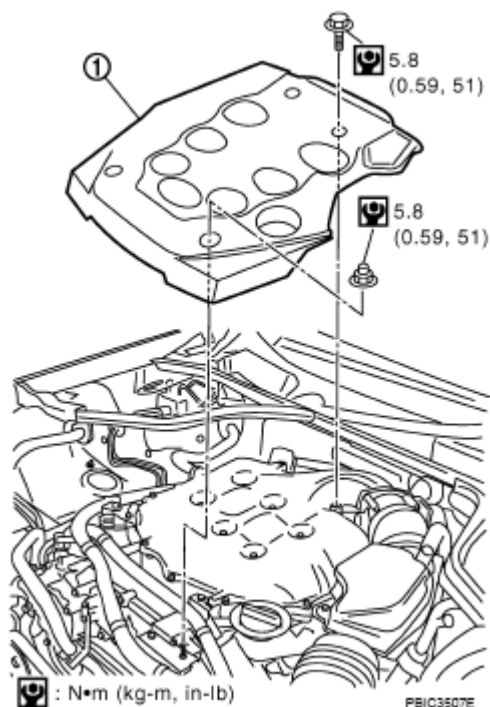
Identifying Engine Cover And Bolts With Torque Specifications
